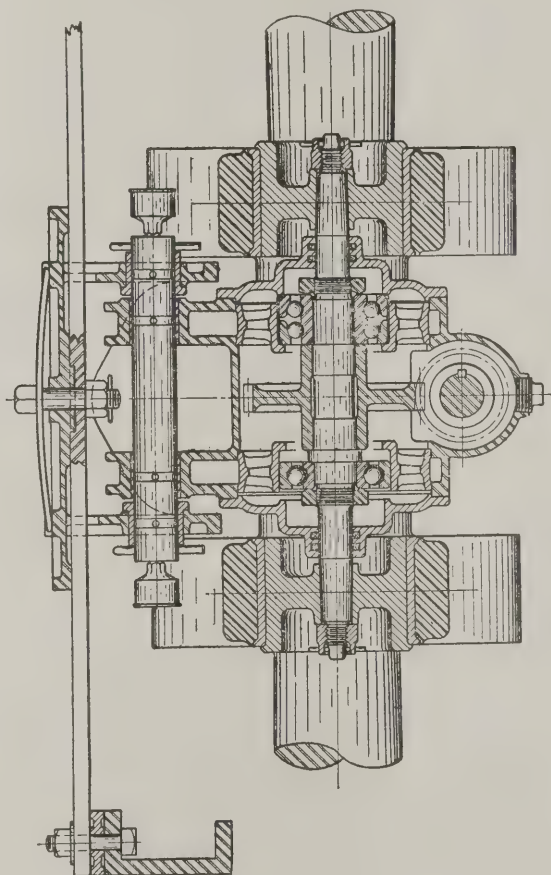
Section Showing Details of Construction of U. S. L. Drive
